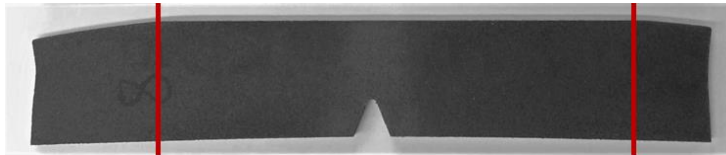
View of the 90VR1PA12\_-1\_8 specimen after the straightening procedure; the straightened central part of the specimen is included in between the two red lines that have been drawn. The test machine grips clamped the specimen until much further than where the straightened part begin.
